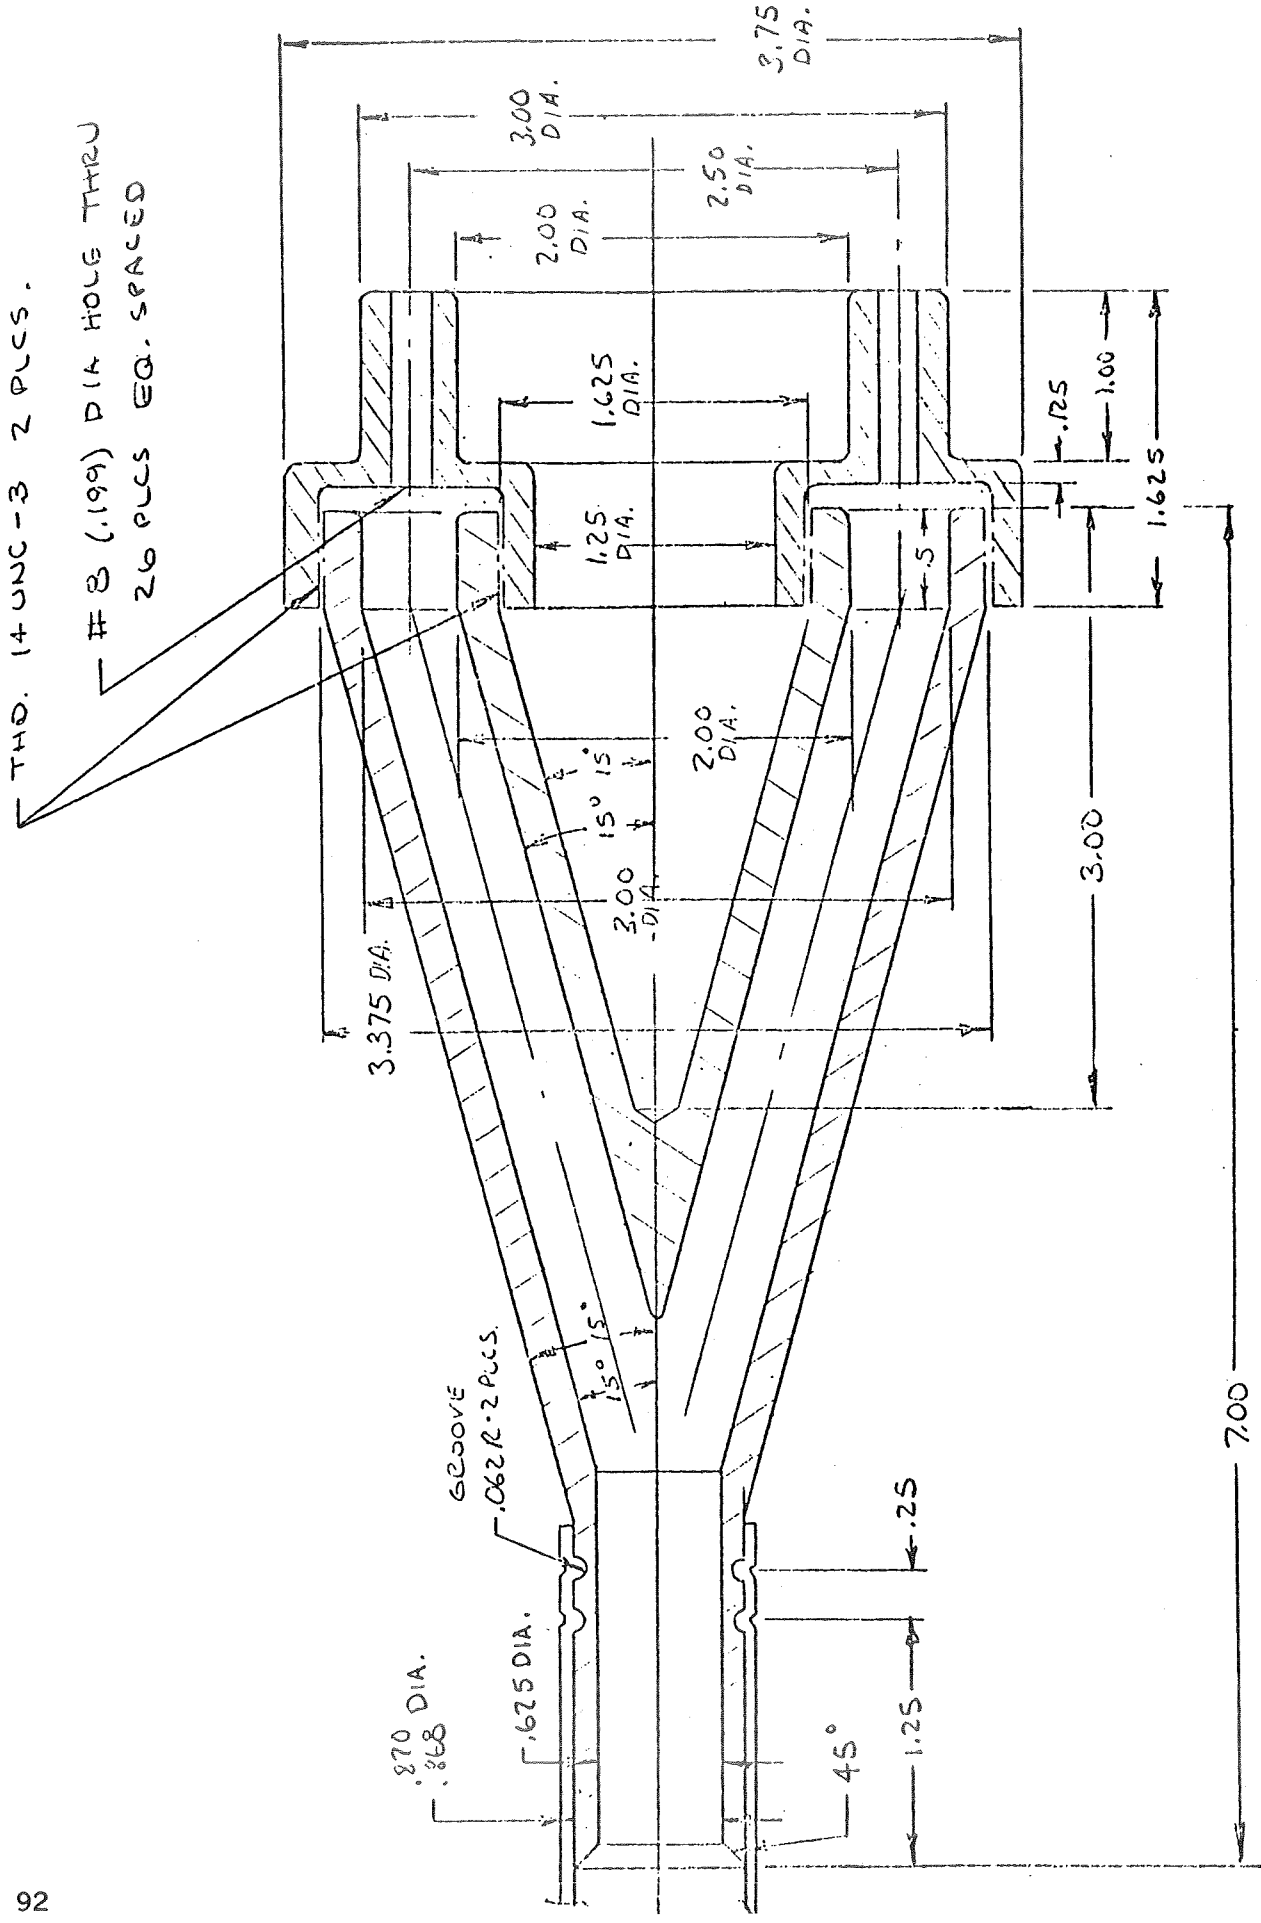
SHOWERHEAD DIFFUSER INJECTOR
